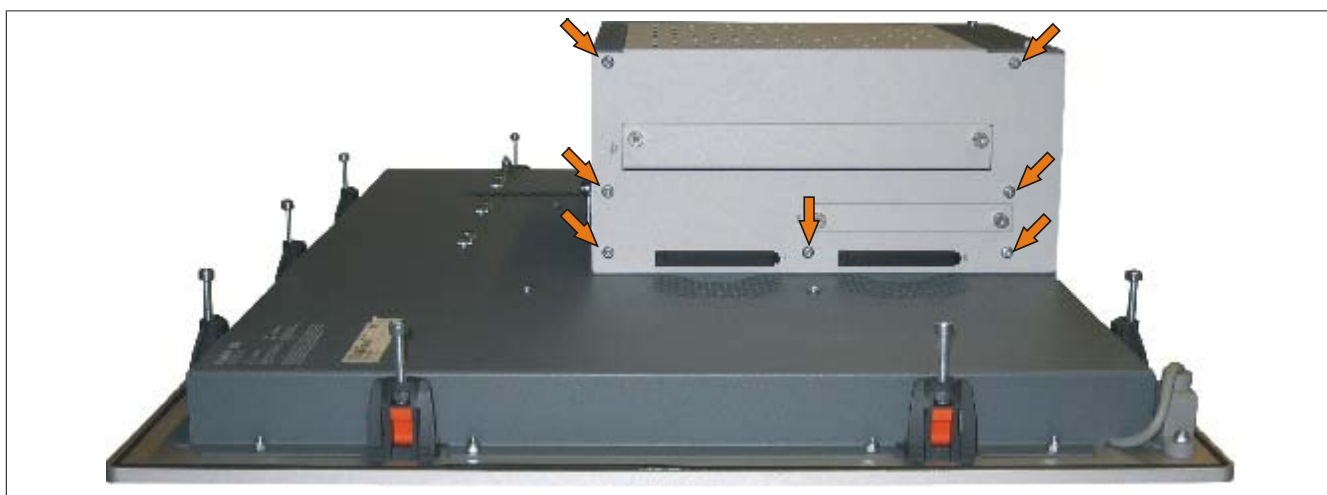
Mounting the side cover on a PPC800 with expansion (1 slot expansion shown in image)
